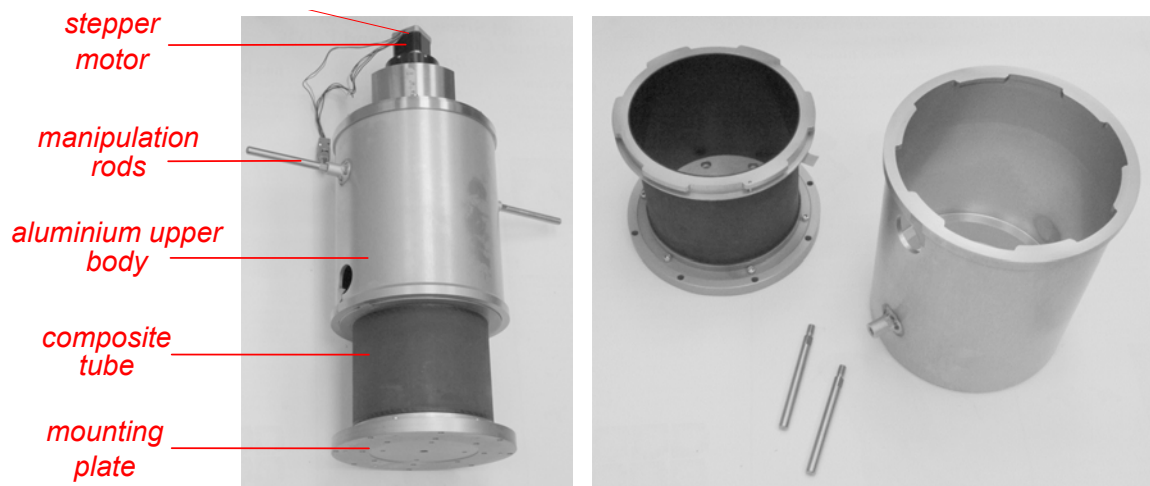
Overall view of new design and description (left). Detailed view of assembly parts (right)
